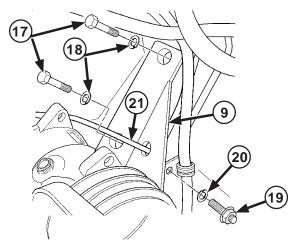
Compressor Mounting Bracket to Cylinder Head
